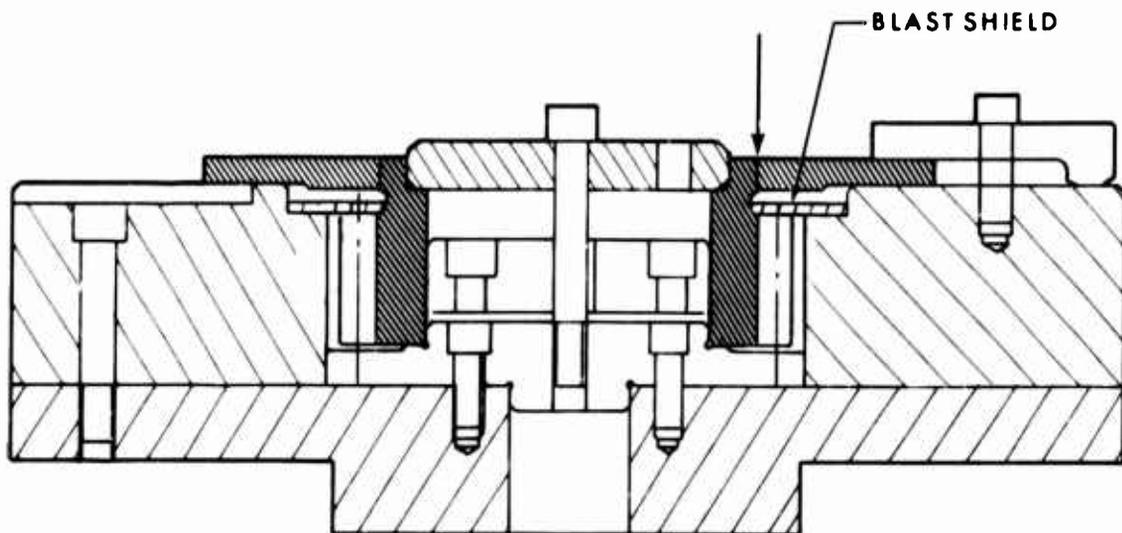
Welding Fixture for Second-Row Pinion Upper Gear to Plate Weld.
